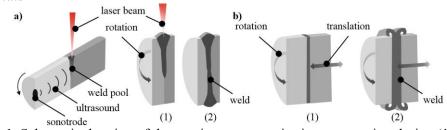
Schematic drawing of the specimen geometries in cross section during (1) and after (2) welding: a) laser beam welding; b) friction welding
